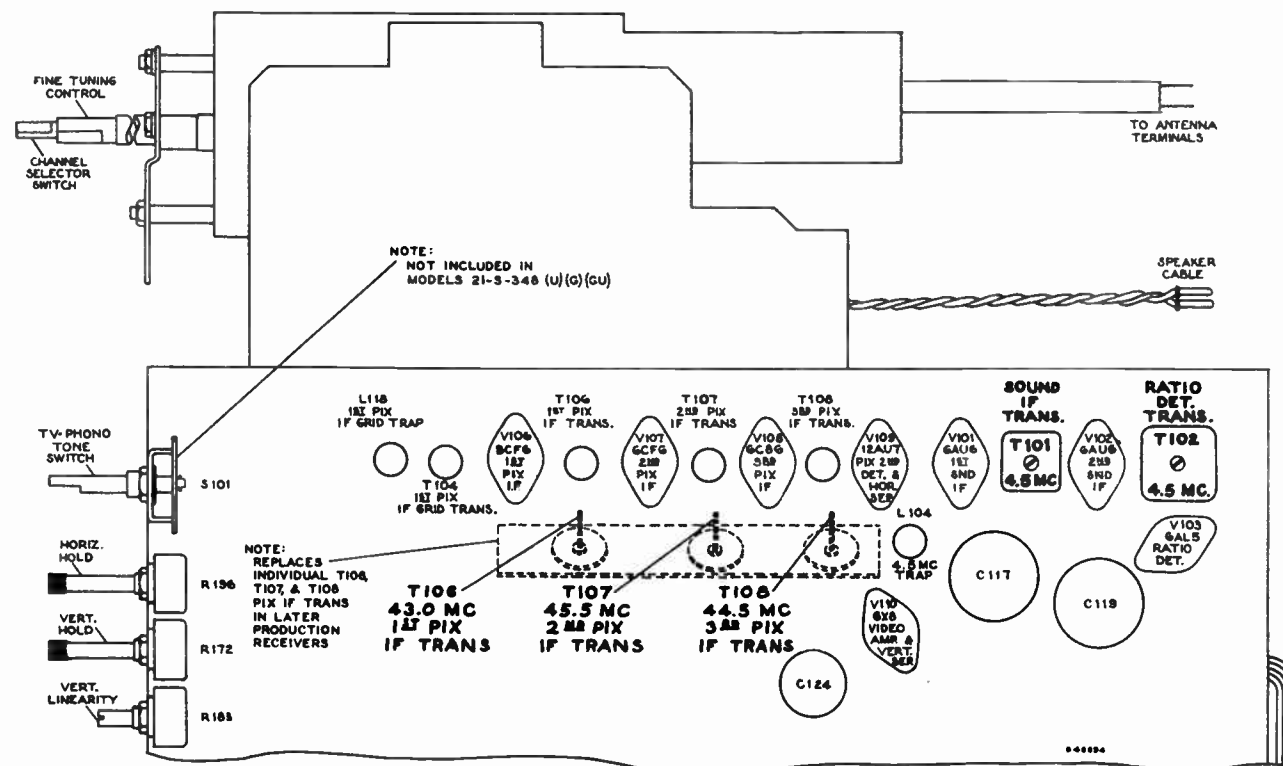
Bottom Chassis Adjustments (KRK29 Tuner Shown)
